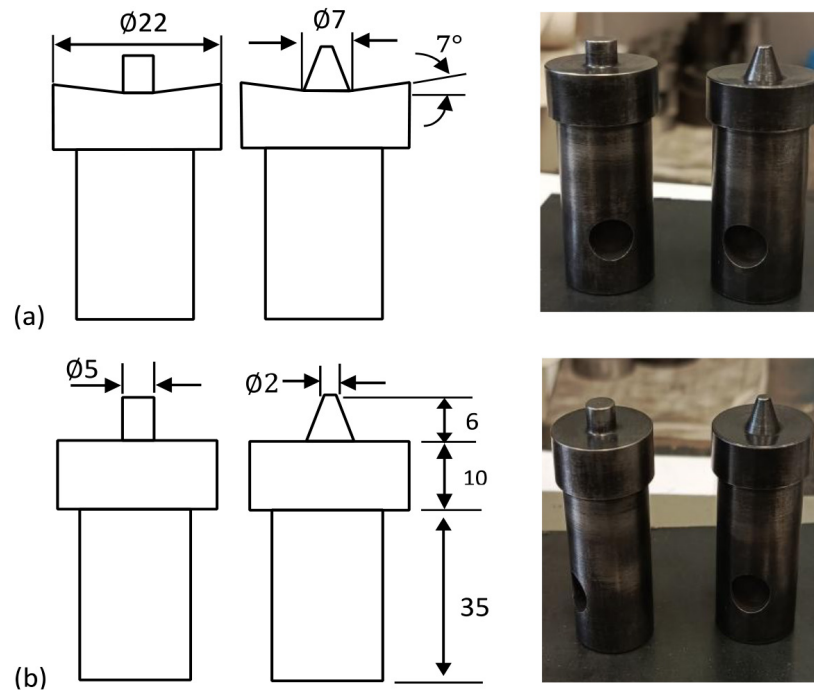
FSW tool geometries; tool dimensions, CAD design and fabricated tools.
